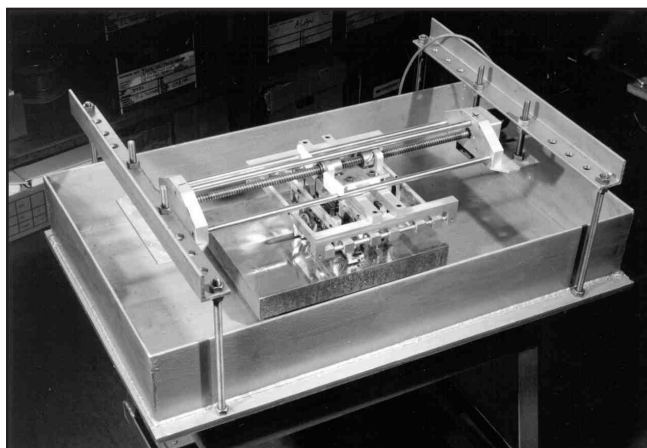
Oil bath and ultrasonic inspection equipment used for groove welds.
